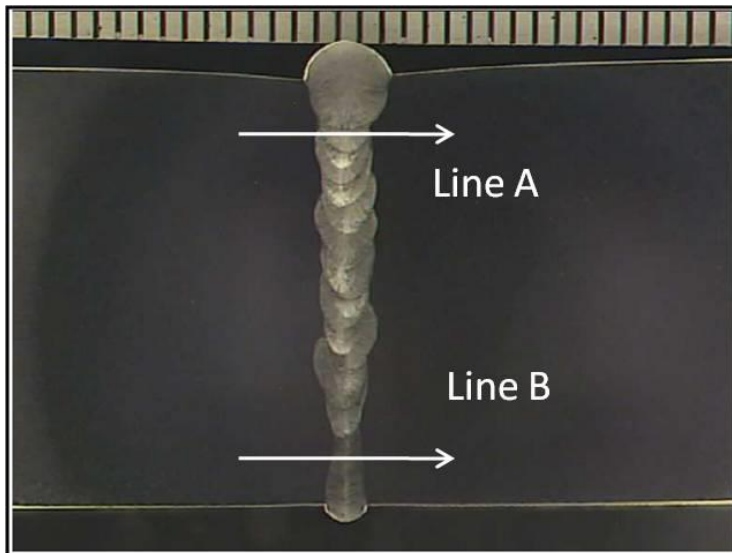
Cross-section of welded joint of 20mm 316LN
